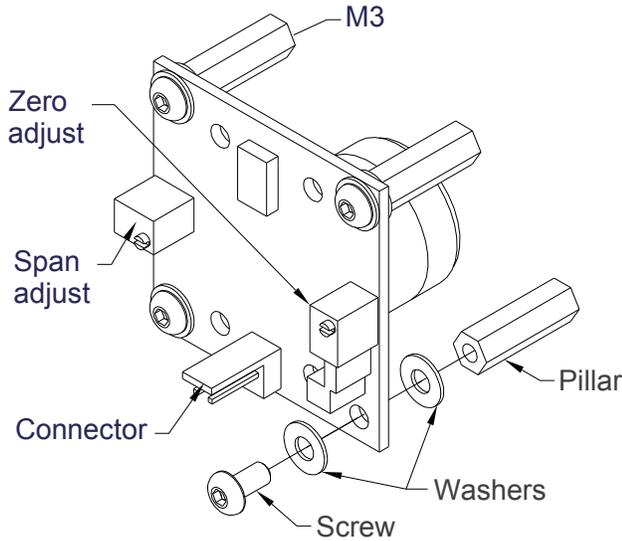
Mounting pillar configuration for attaching to the lid of an enclosure.
